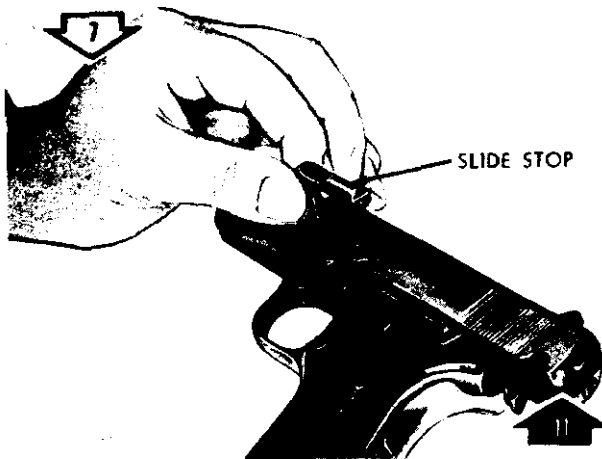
Disassembly/assembly of barrel and slide group (1 of 4).
